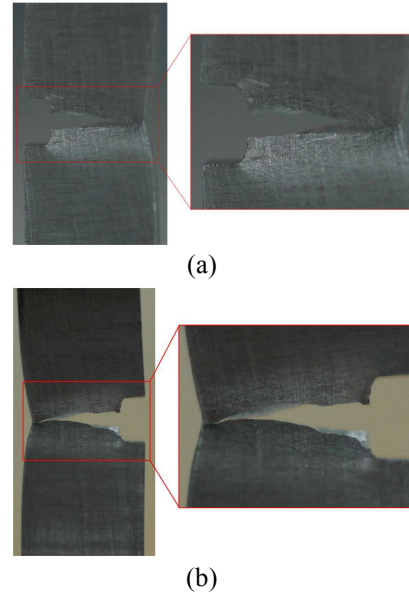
The third step of crack growth test: (a) front side and (b) back side of specimen
